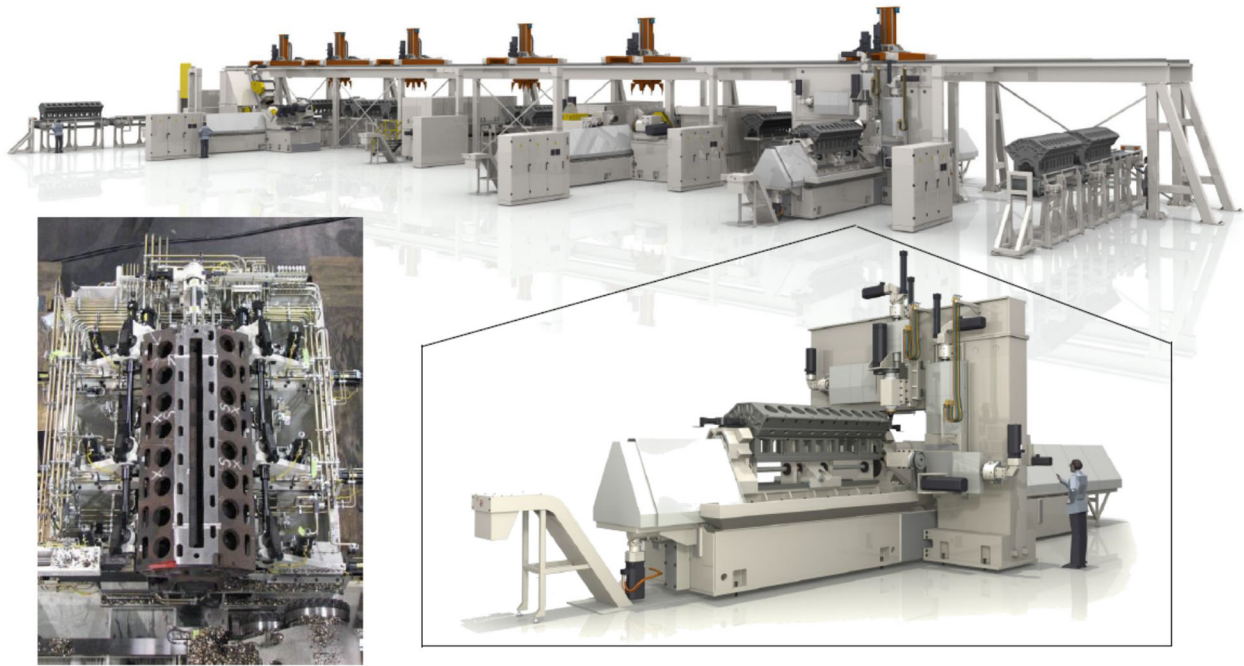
Production line (pre-machining) for V8 to V20 cylinder crankcases for automatic series production by MAG with technology, tools, fixtures and loading gantry (component: CATERPILLAR Mapleton), workpiece: max. 4,500 kg raw, 4,100 kg finished
